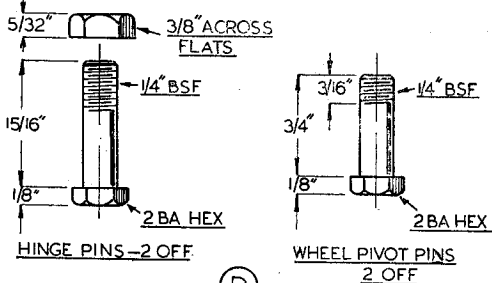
Left—the arm hinge pins. Right—the wheel pivots
